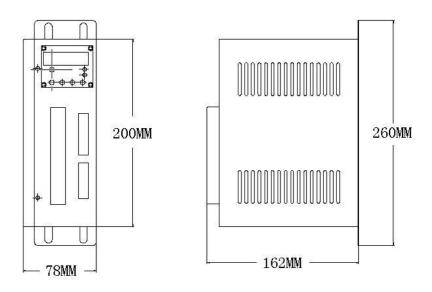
Outline Dimensional Drawings for the Servo Driver of 30A/30A
